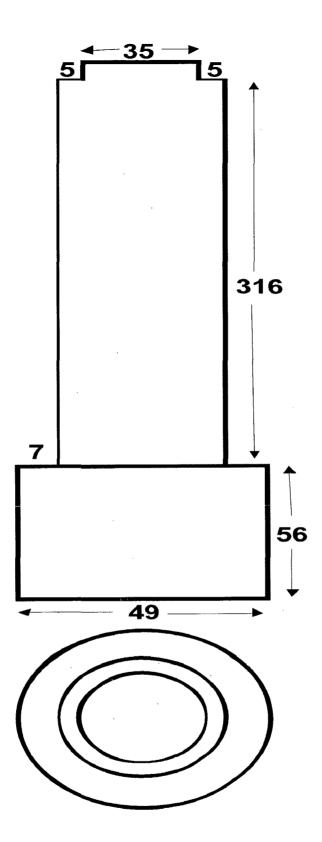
Details of Piston Assembly (dimensions in mm)
